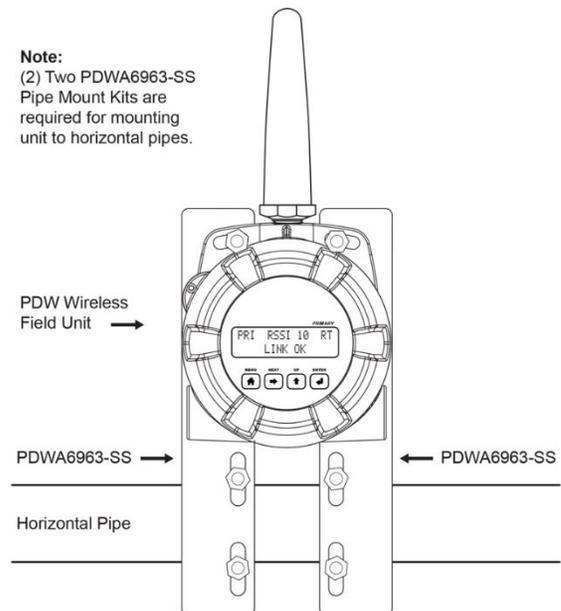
PDW Unit Mounted to Horizontal Pipe with Two PDWA6963-SS Kits
